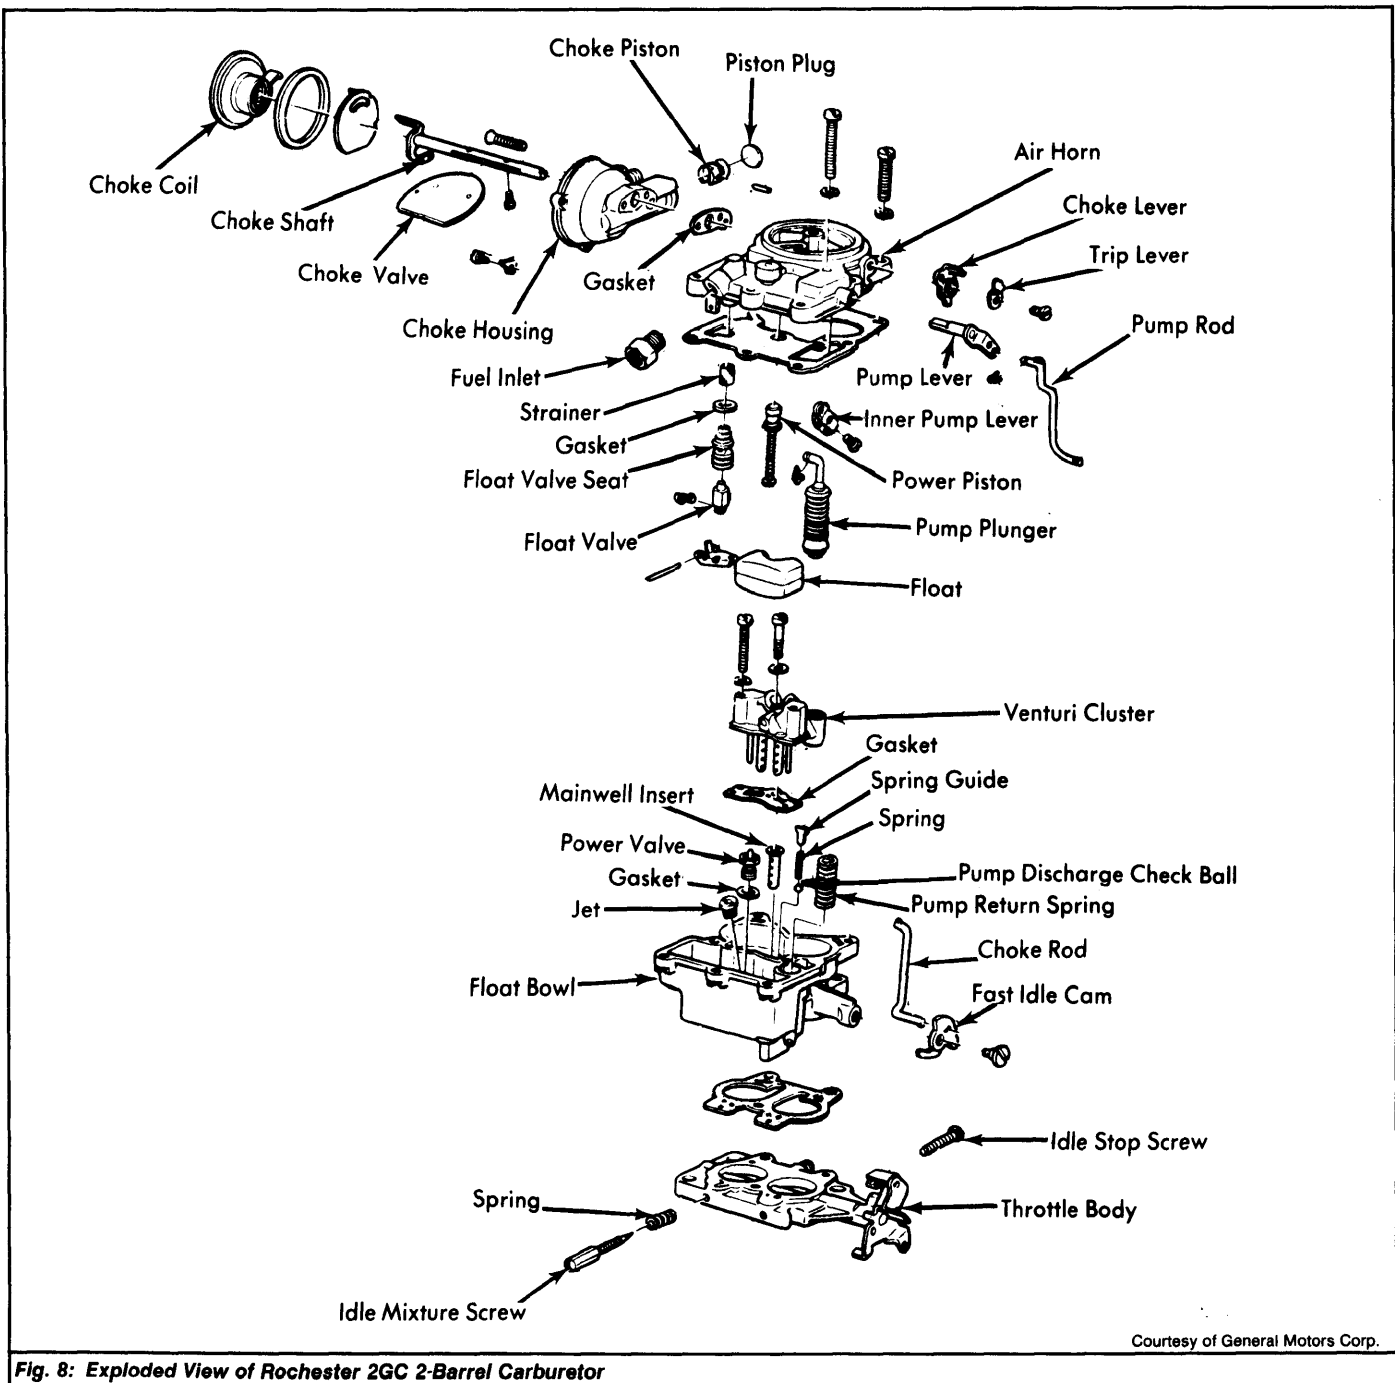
Exploded View of Rochester 2GC 2-Barrel Carburetor
